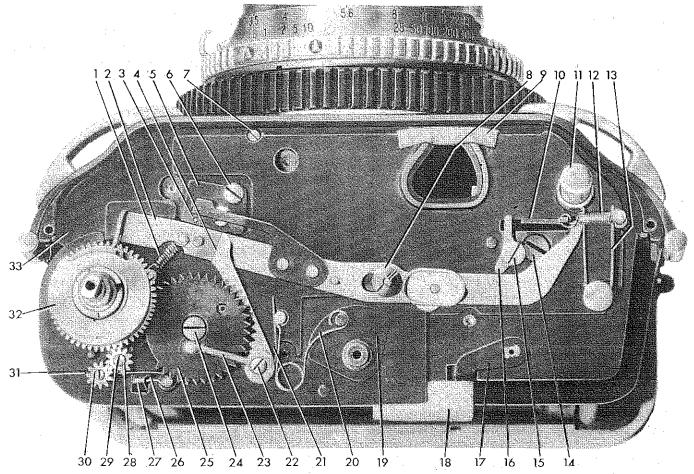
Mechanism Plate and Parts on Mechanism Plate
